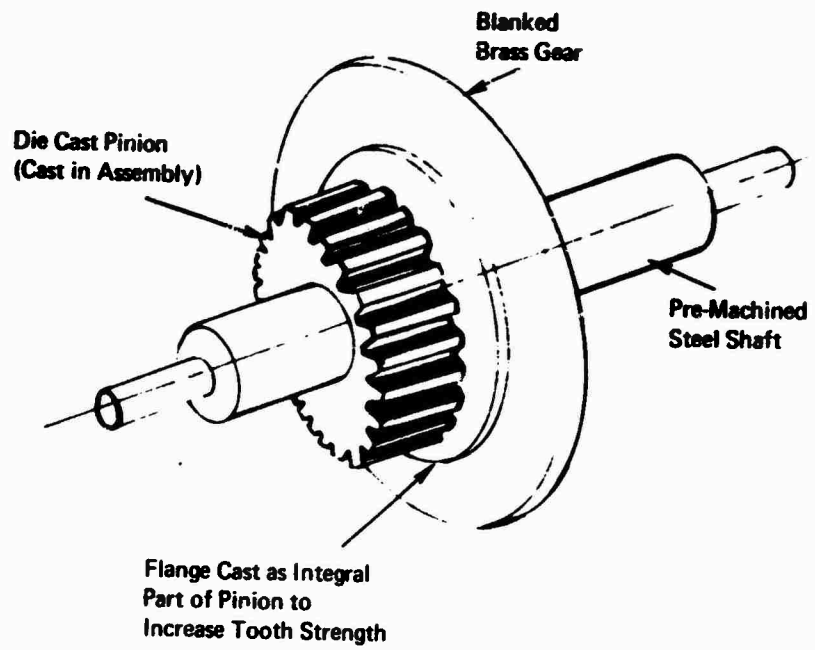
Pinion/gear assembly produced by zinc die casting process.
